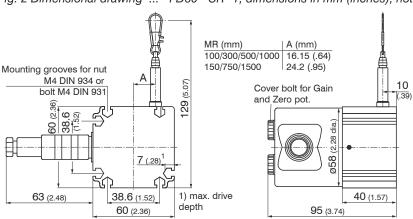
Dimensional drawing ... - FD60 - SR - U/I, dimensions in mm (inches), not to scale
